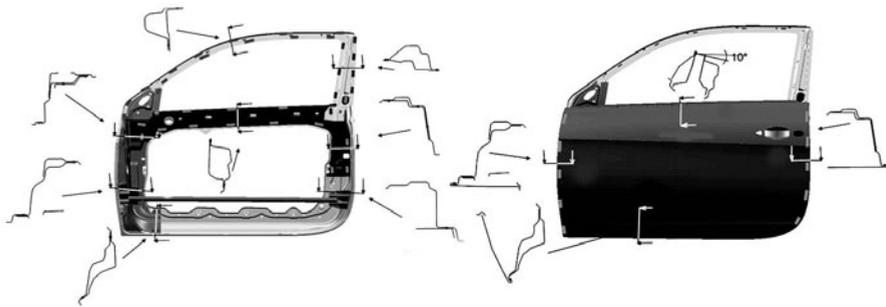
Example of laser weld design on door hem and window frame contour: weld seams position in different sections are shown.
